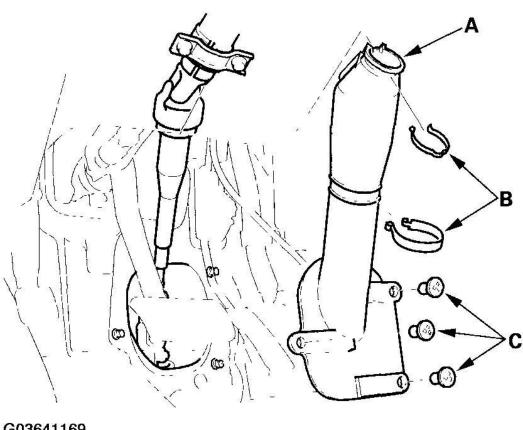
Installing Steering Joint Courtesy of AMERICAN HONDA MOTOR CO., INC.
